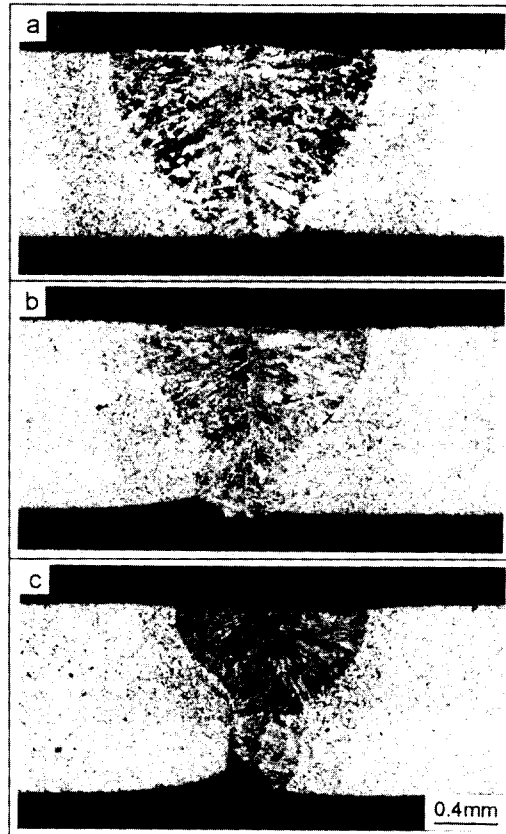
Weld cross-section at the travel speed of 37mm/sec (a), 50mm/sec (b) and 64mm/sec (c)
